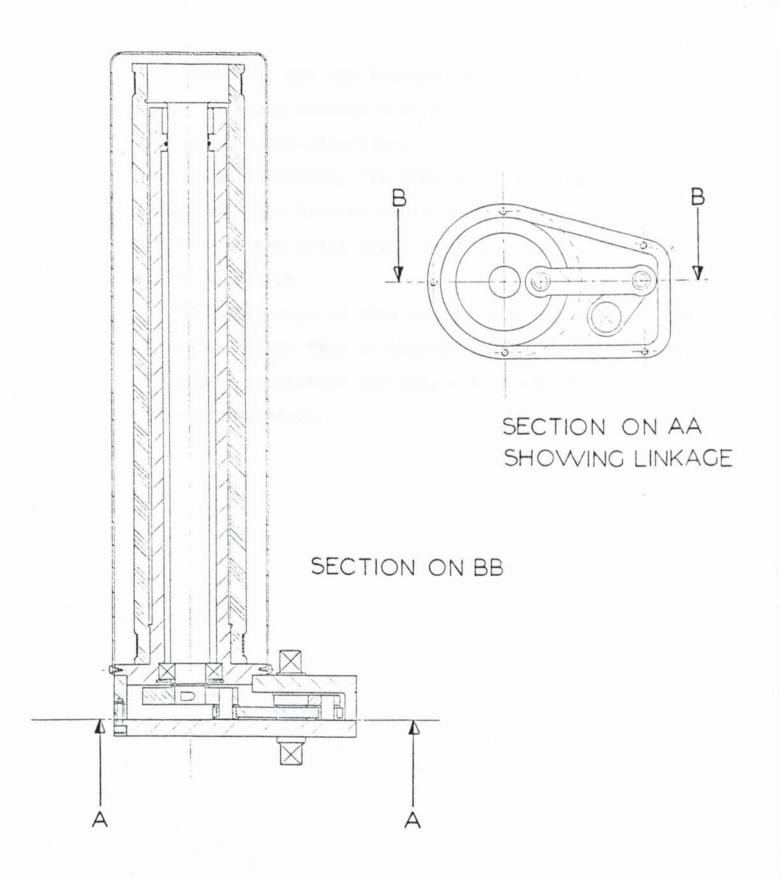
3: SKETCH OF SINGLE HOSE, DOUBLE ACTING TORQUE HOSE ACTUATOR.
